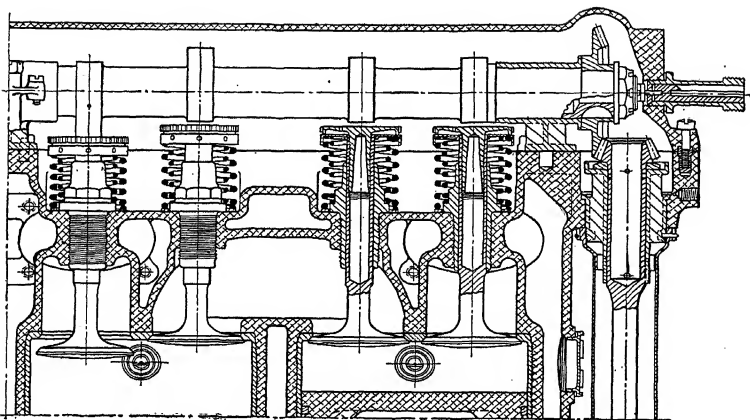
Arrangement of the valve gear used on the Hispano-Suiza, model-H engine.
